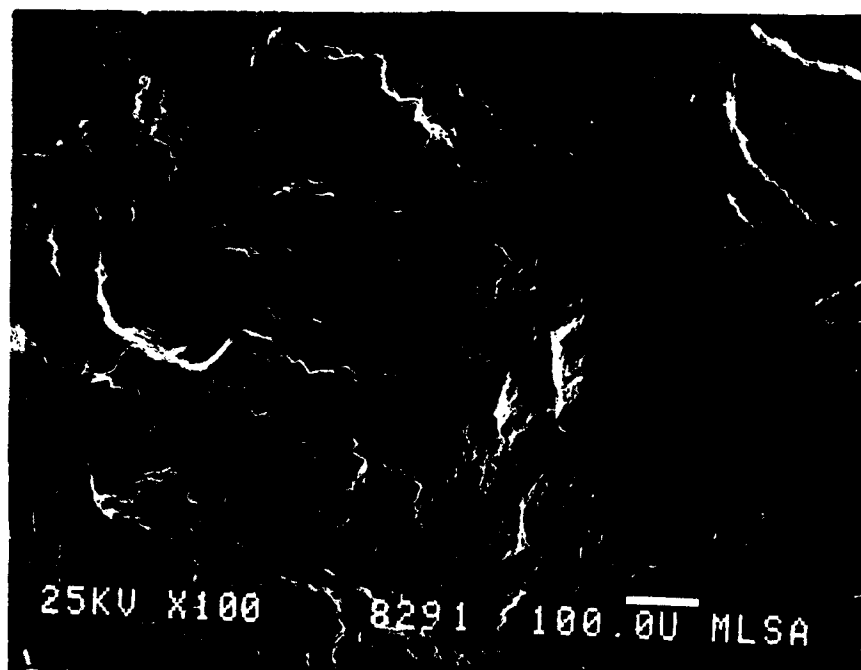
SEM fractography of fracture faces of samples removed from a six-inch-thick Ti-6-4 forging.
